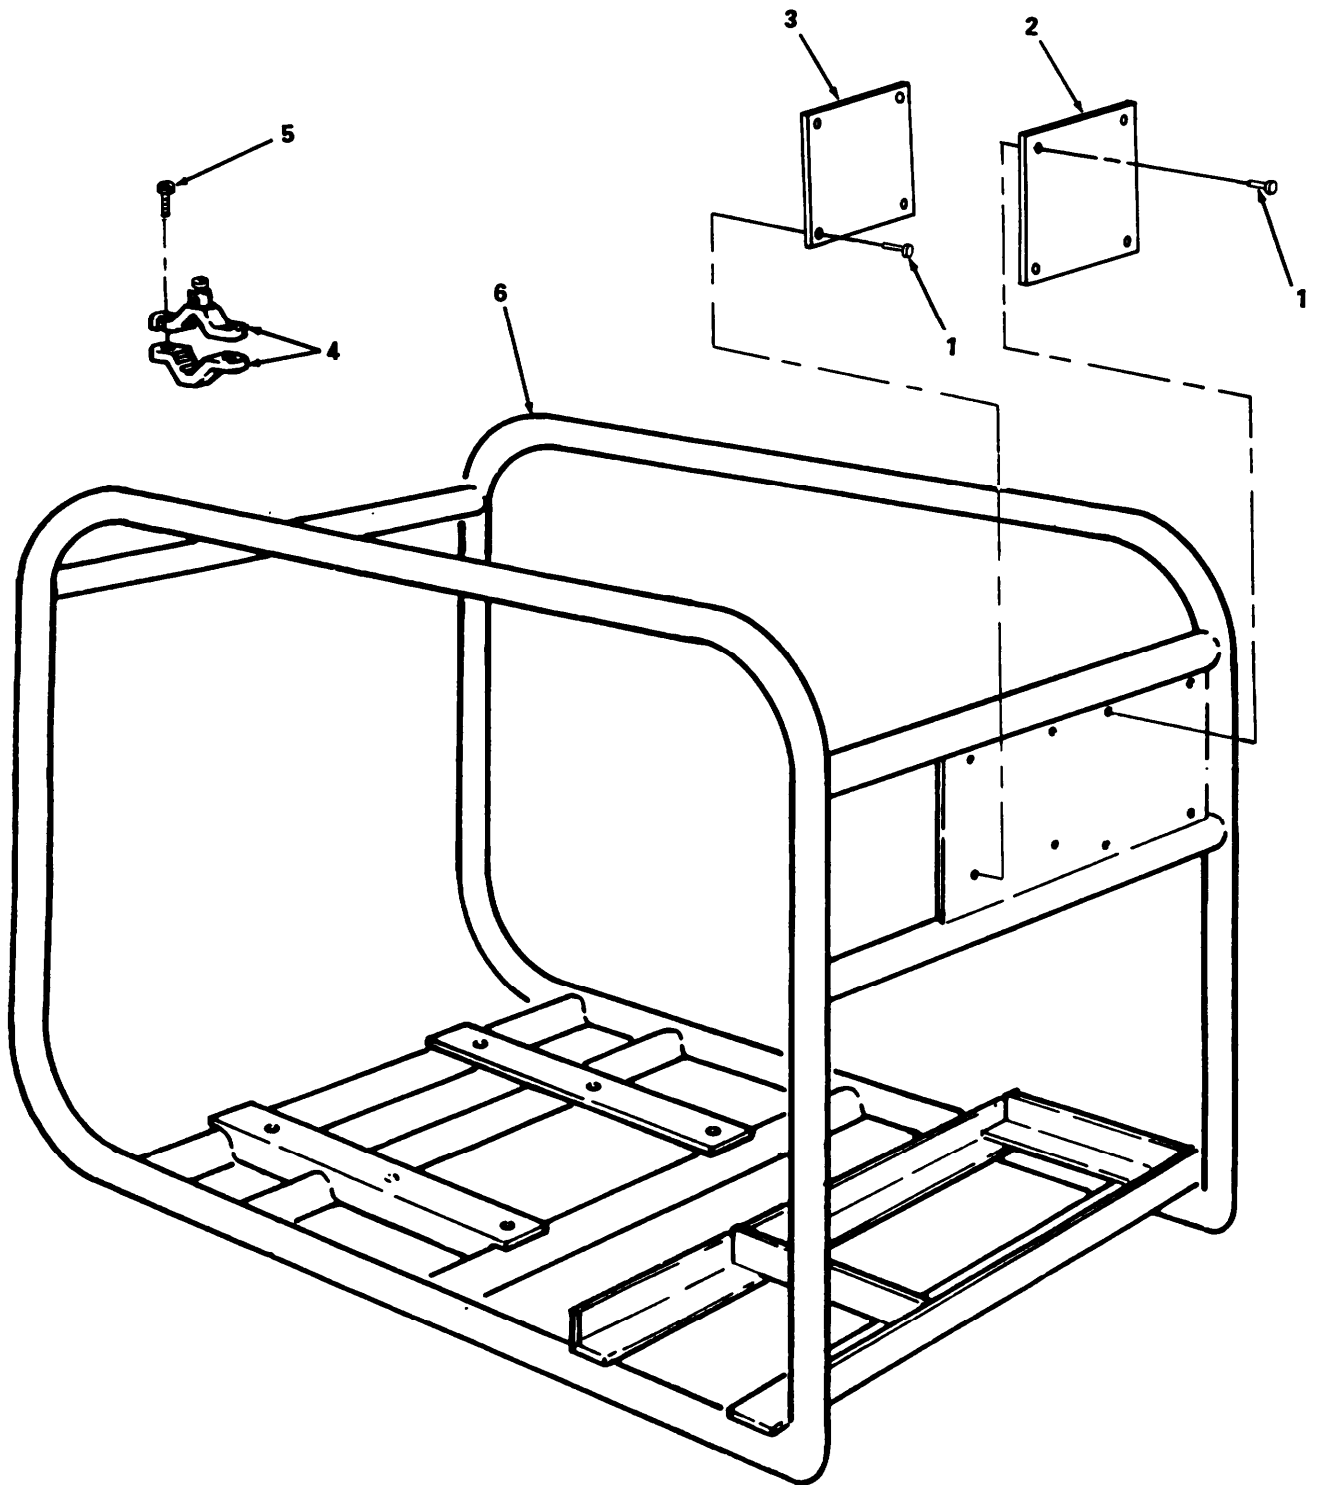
Frame, Disassembly Repair, and Assembly.
